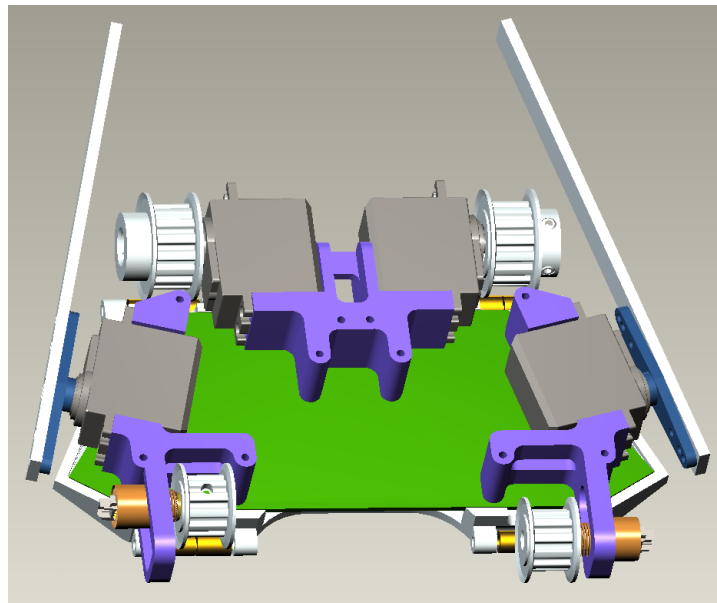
CAD model of the Adelopod-T interior showing crawler tread supports, drive motors, and idler pulleys.
